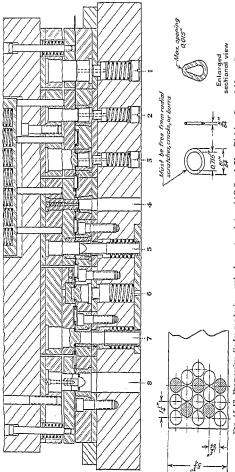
Progressive die for producing spark-plug seat gaskets. (4C Spark Plug Division, General Motors Corp.)
